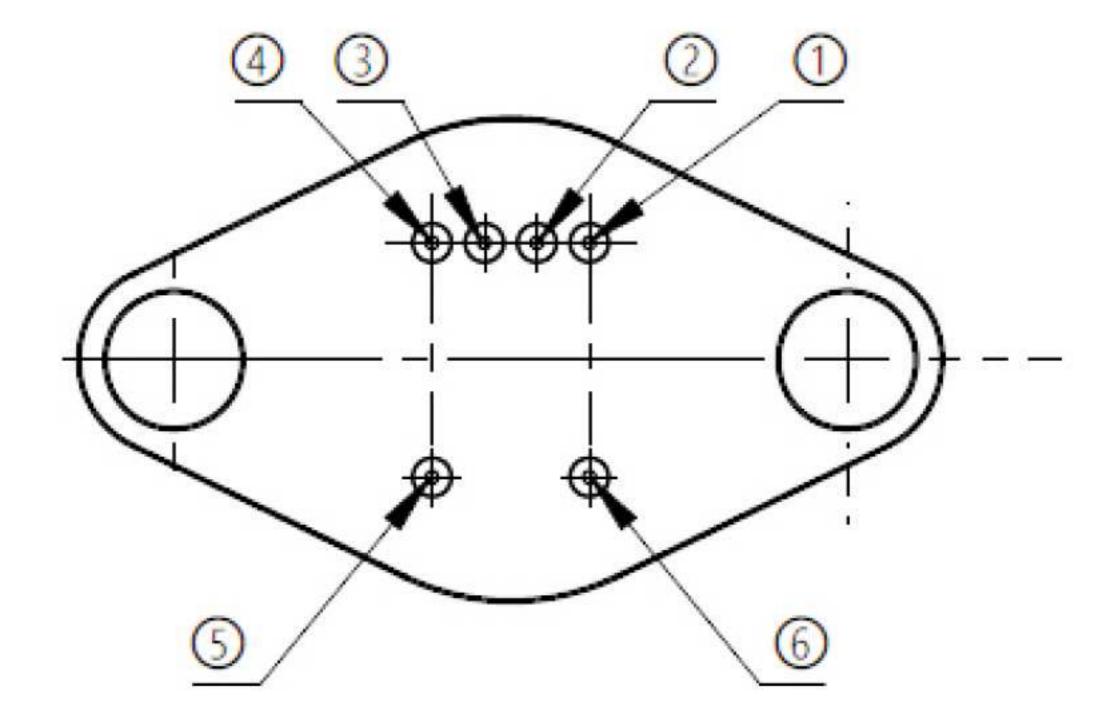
mechanical dimension 2 (Unmarked tolerance±0.1mm)
